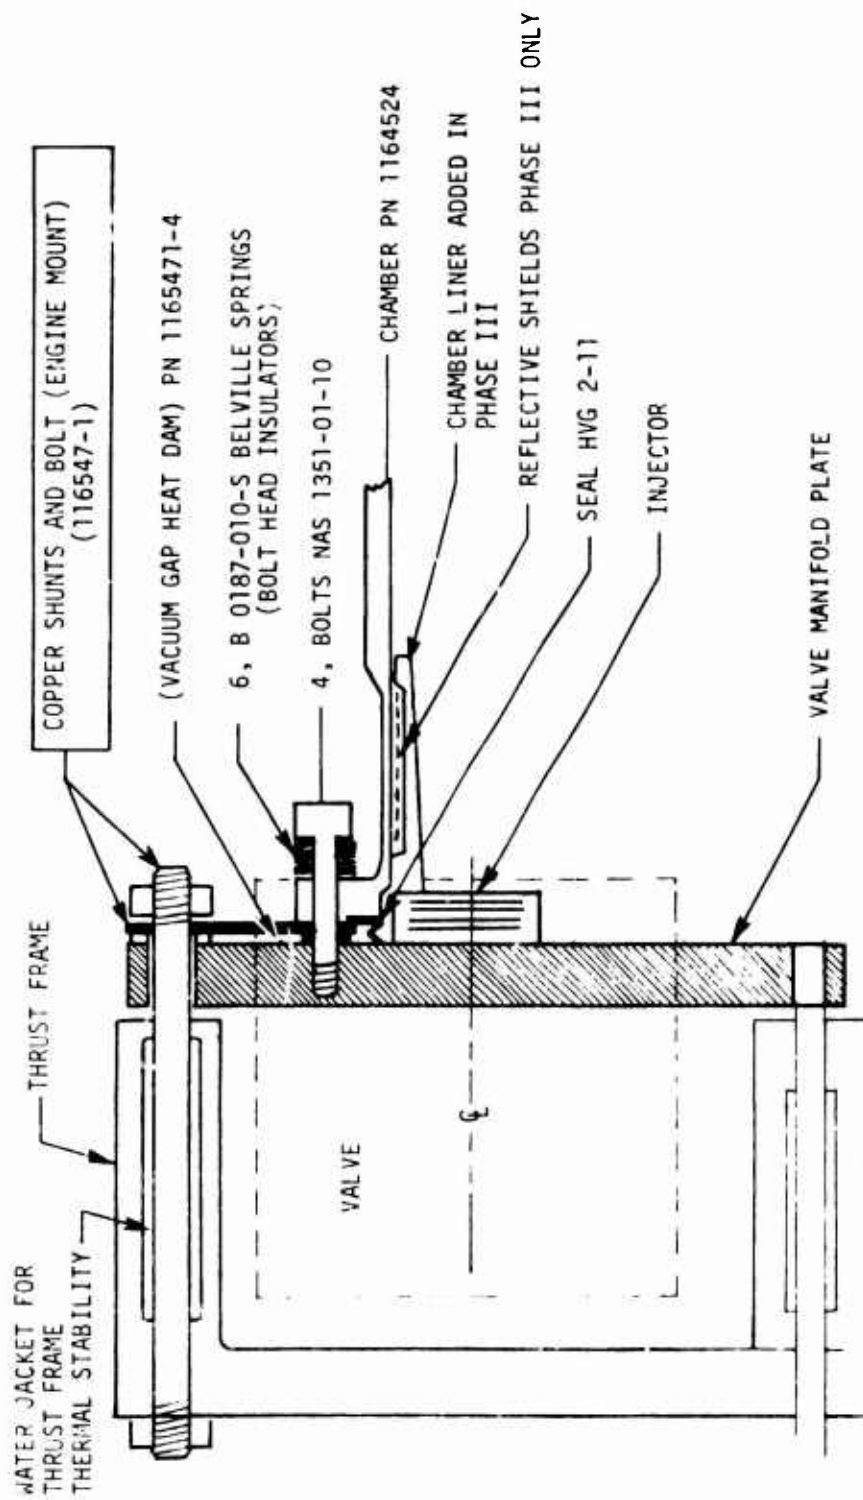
Flange, Thrust Mount and Heat Dams Schematic
